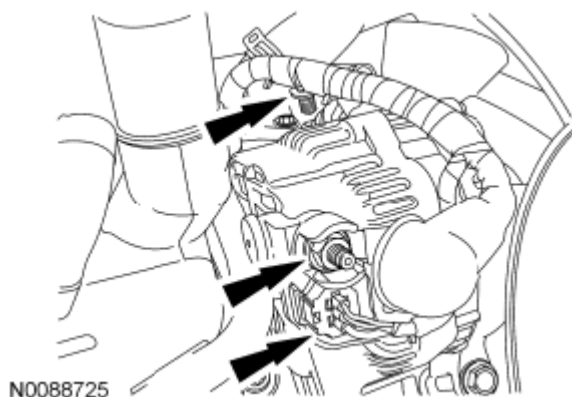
Locating Generator B+ Cable And Electrical Connector With Nut
